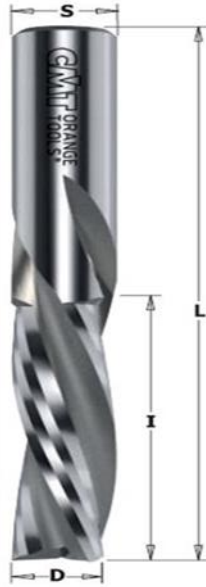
CNC shank spiral finishing cutter – CMT (Italy).
